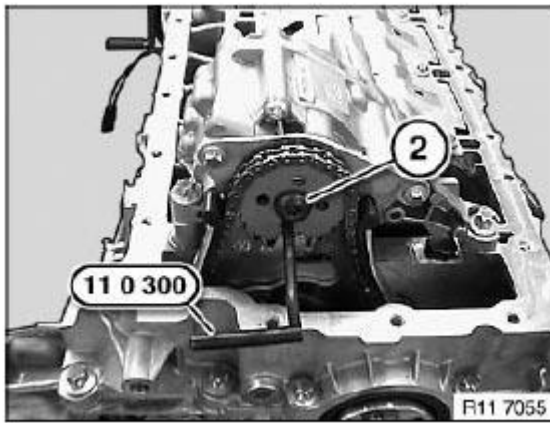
Identifying Central Bolt And Special Tool 11 0 300
